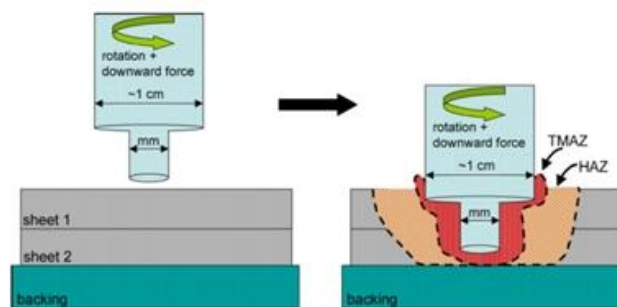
Illustration of the friction stir spot welding process⁵⁶.
